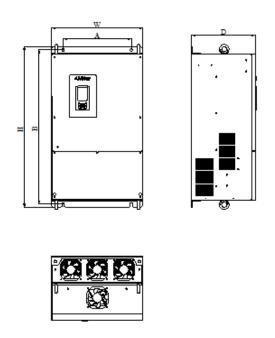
Installation dimensions of AS450 4T0030~4T0355
